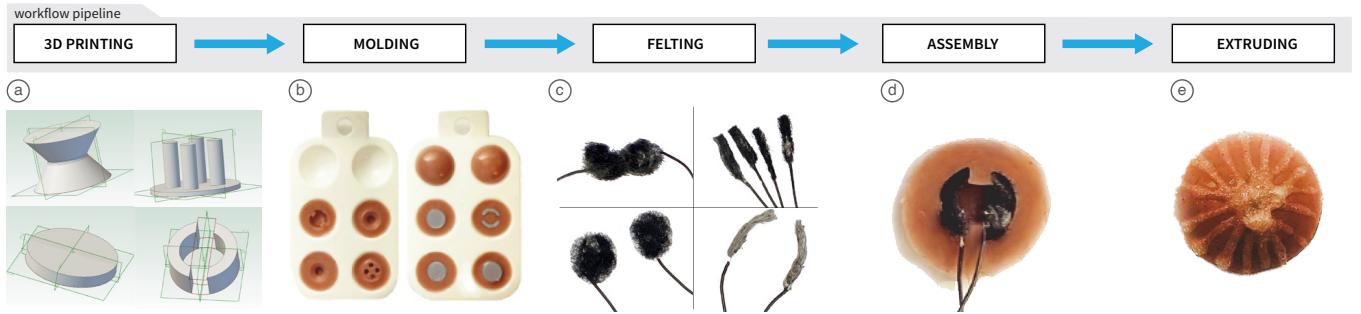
Workflow pipeline. a) 3D Modeling and 3D printing the different components for each sensor; b) molding with a paint palette for the sensor enclosures; c) felting electric nodes made out of stainless steel roving for each sensor; d) assembling the molds, 3D printed parts, and electric nodes; e) extruding the outer-shell texture with combination of ecoflex and flaxseed mucilage.
